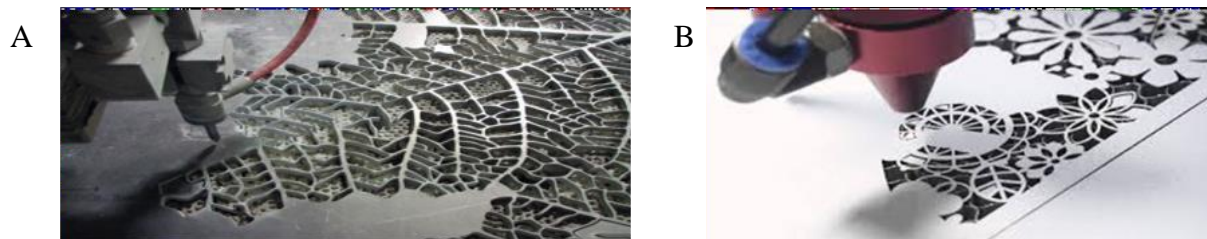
(A) Demonstrates water-jet cutting technology ; (B) Explains the cutting technique using laser beams. The two figures show cutting using the biaxially moving cutting head.[2]
